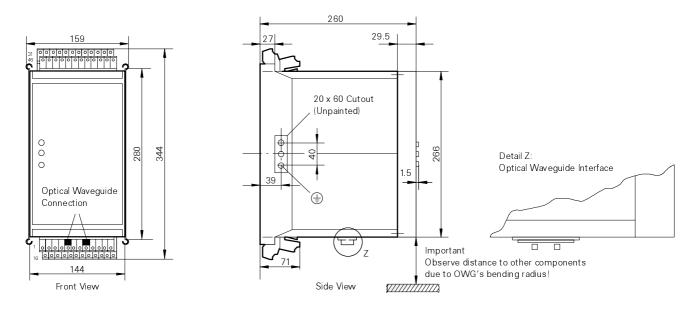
Dimensional Drawing of 7XP2030-1 for Panel Surface Mounting, Device Version 7SA518 (all dimensions in mm)
